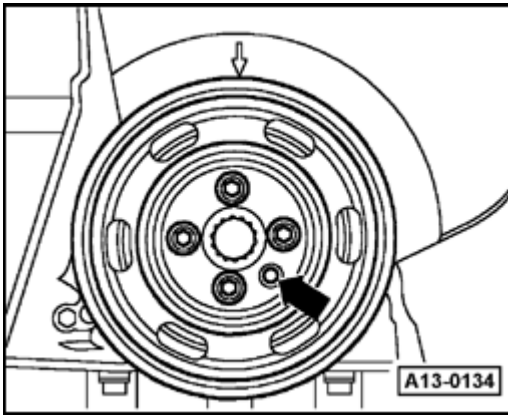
Tightening Vibration Damper/Pulley, Take Note Of Locating Point
